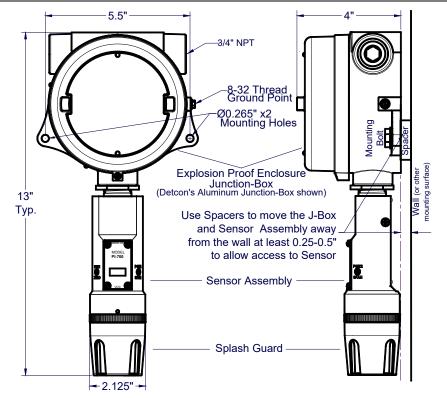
Outline and Mounting Dimensions (Aluminum Junction Box)
